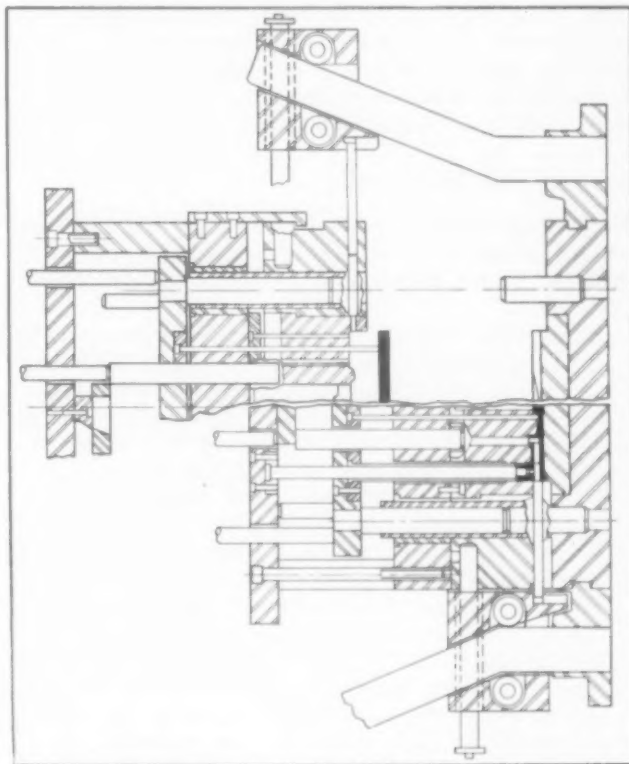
In the part above, it is required that the surface be almost as flat as a machined surface, yet bosses prevented machining of the surface. A number of complications in ejecting arose, necessitating a rather intricate ejection design.
